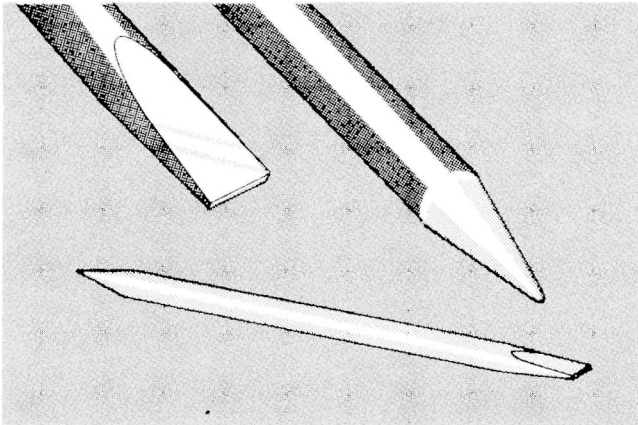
A soldering aid constructed from a 1/4 inch wooden dowel.
